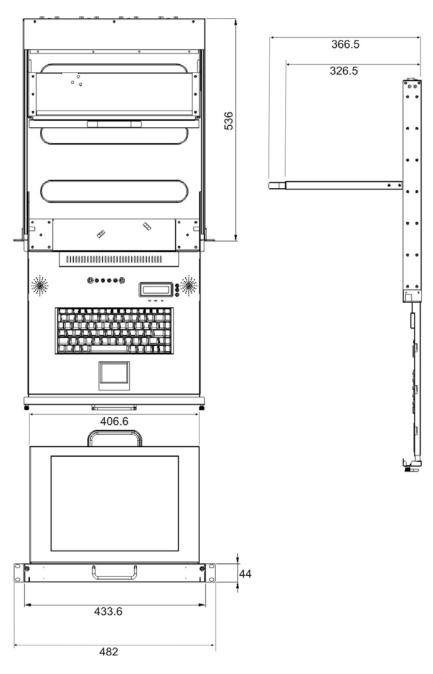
LKM-935 Physical Dimensions (millimeters)
